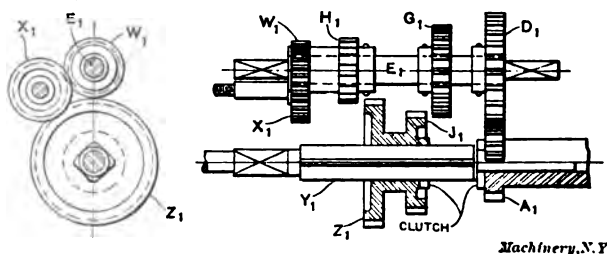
Sketch showing Arrangement of Gears in Transmission Case
